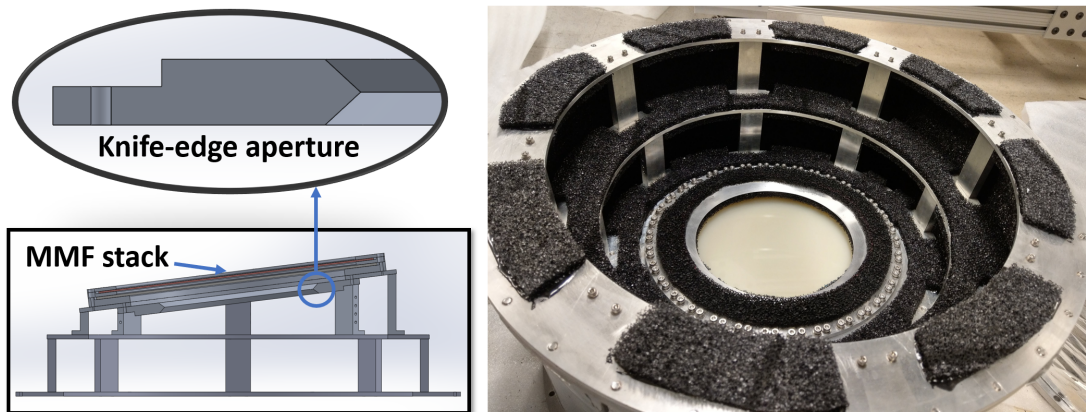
CAD cross-section of the knife edge aperture and Lyot stop tower (*left*) and picture of an assembled POLARBEAR-2b Lyot tower (*right*).
